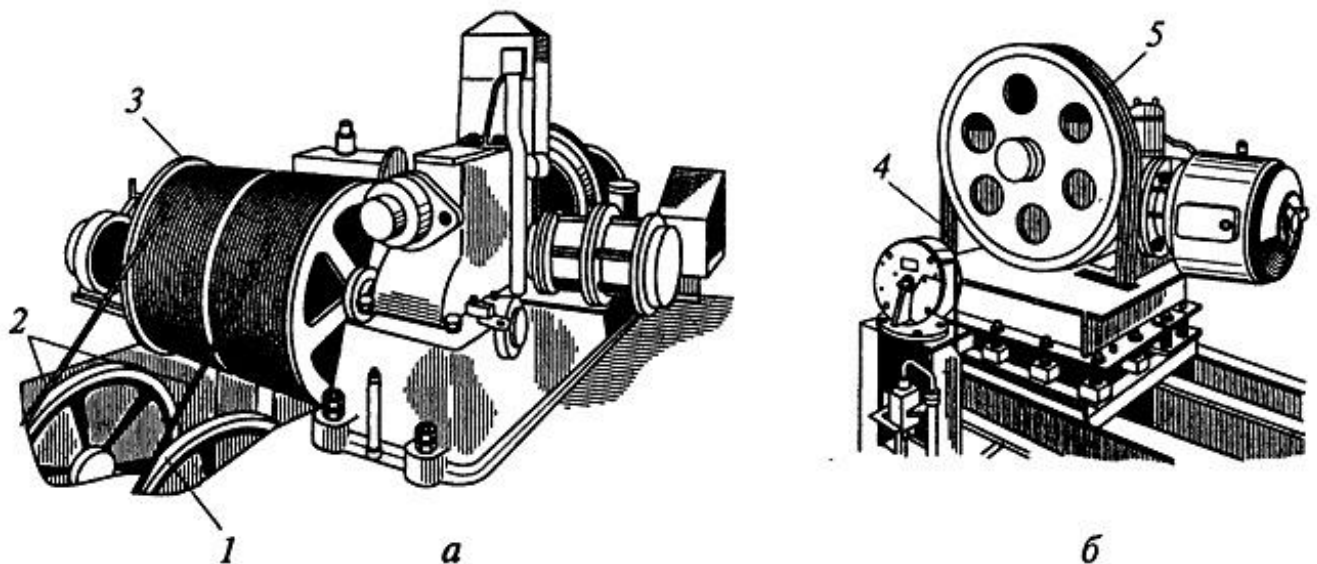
Hauler types: a is the drum winding hauler; б is the hauler with a traction sheave equipped; 1 is the angle pulley; 2, 4 are the ropes; 3 is the drum; 5 is the traction sheave
